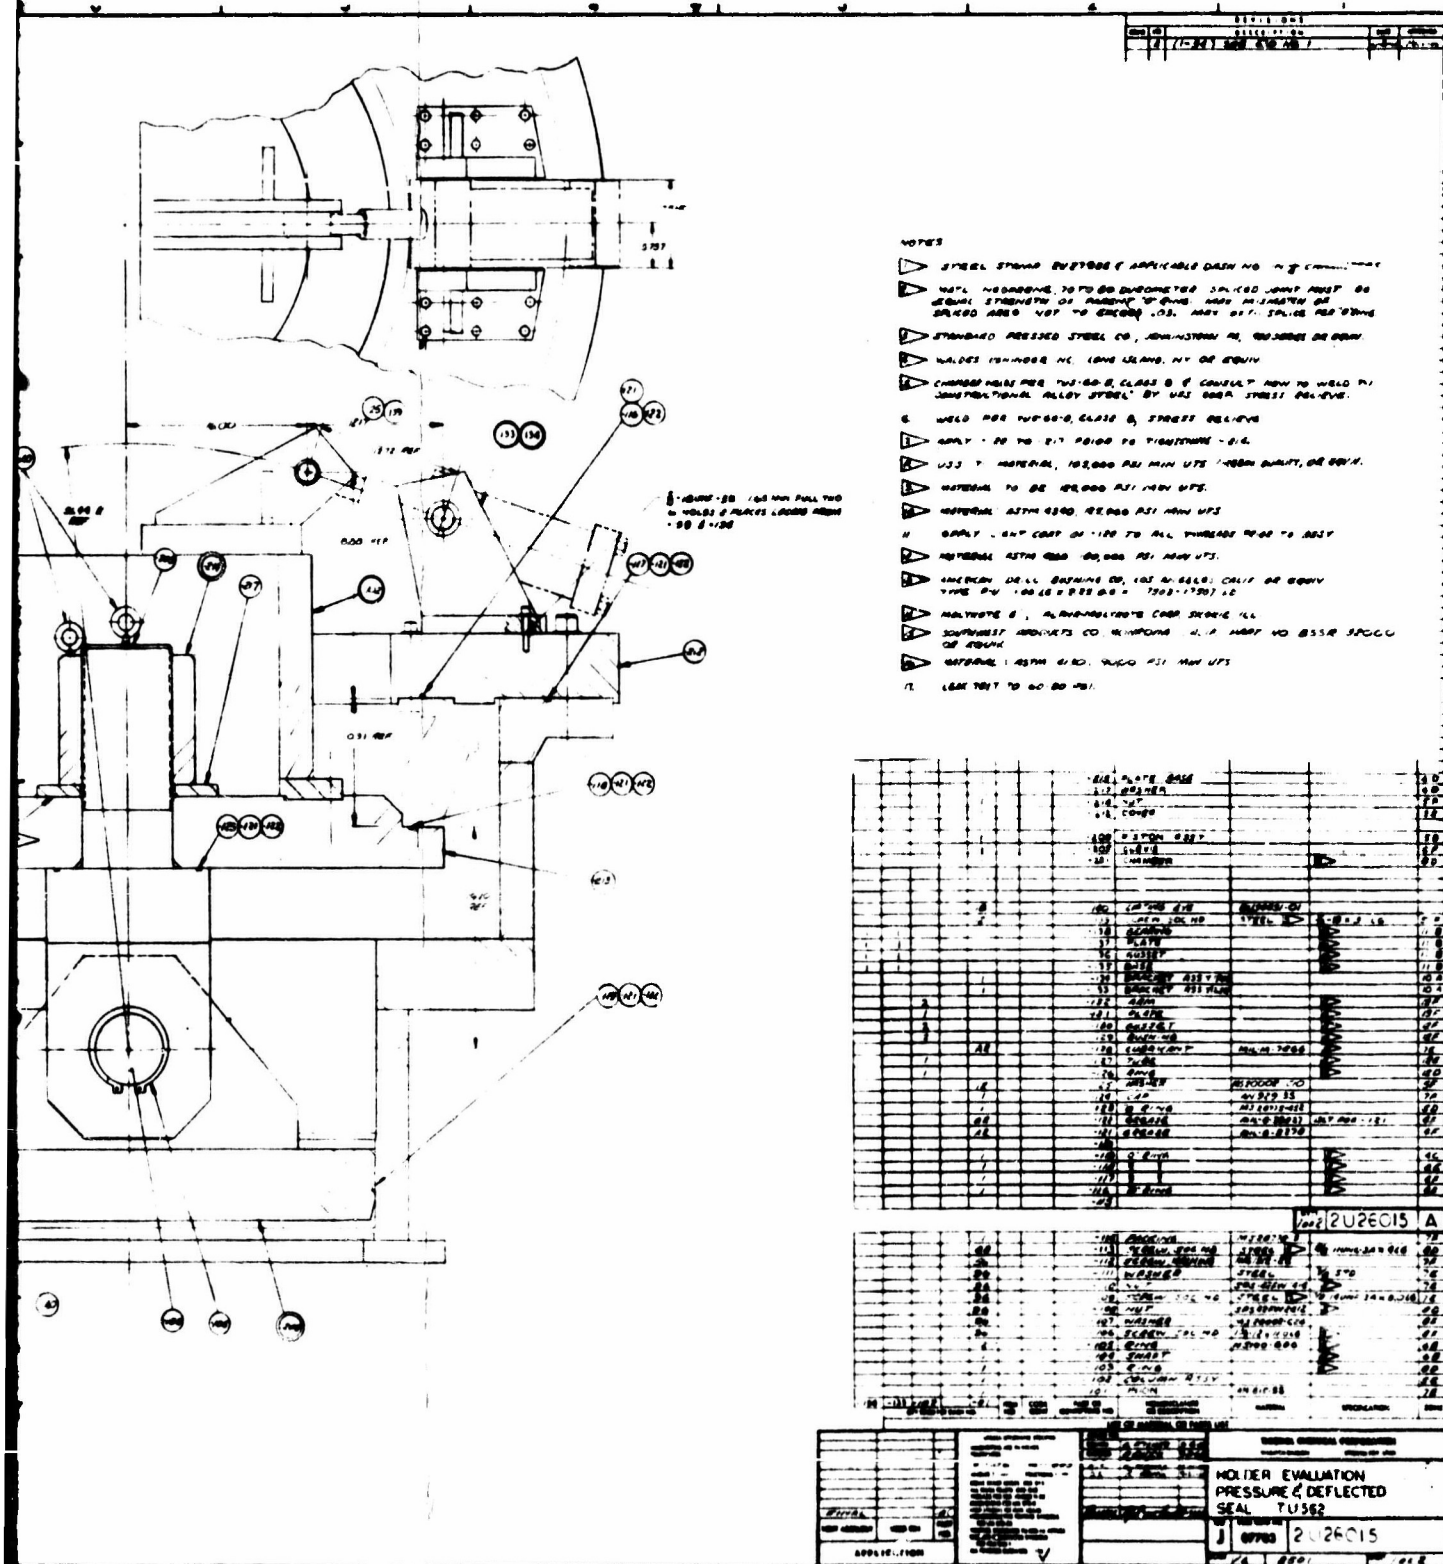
Flexible Seal Test Fixture (Sheet 1 of 2)
